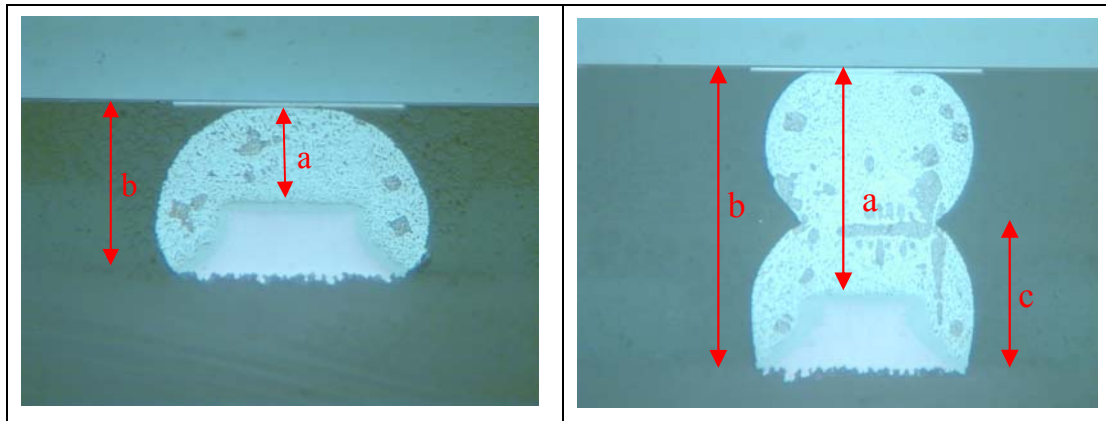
Cross-sectional pictures of single bump flip chip on board and double bump flip chip on board
